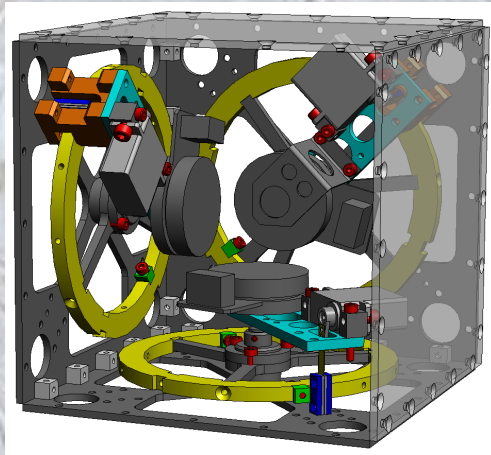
The CAD drawing of the Cubli with one of the acrylic glass covers removed.
